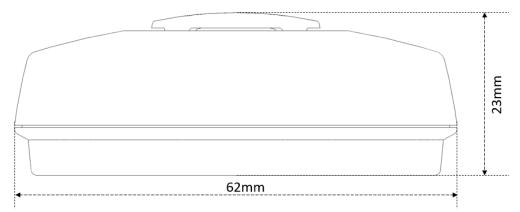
Modbus CO2 Sensor Dimension - Side View Flush Mount
